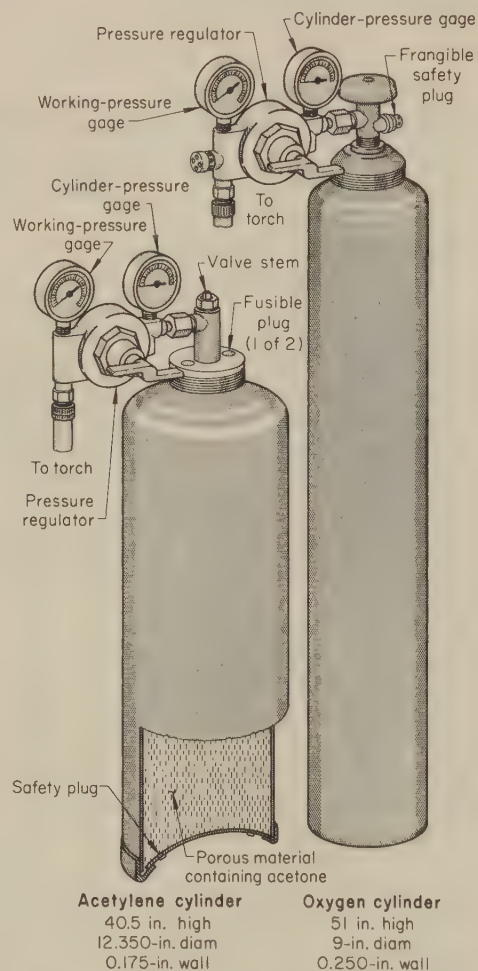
Portable gas cylinders and regulators used in gas welding. The oxygen cylinder is the standard 244-scf-capacity cylinder, and the acetylene cylinder, the standard 275-scf-capacity cylinder.
